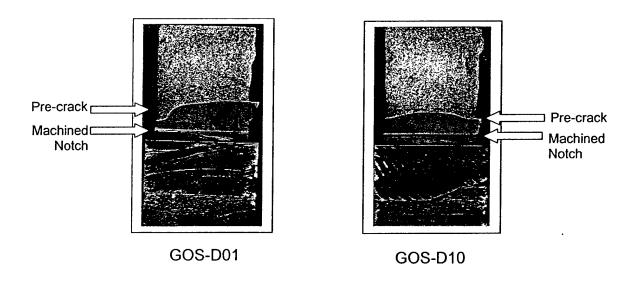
Fatigue pre-cracks for deep crack specimens with transverse compression showing range from worst to best.
